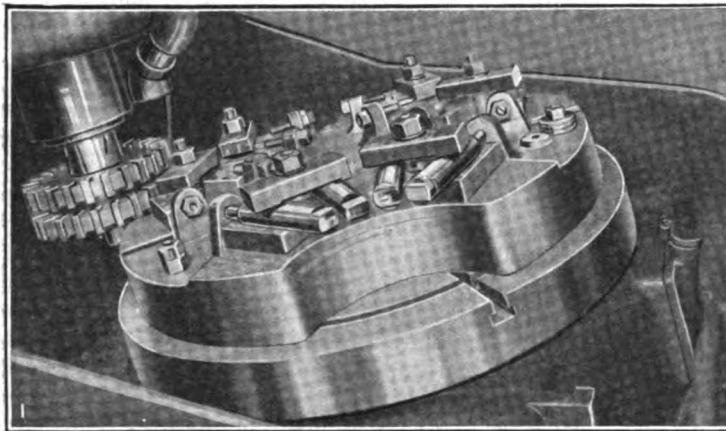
SPECIAL FIXTURE FOR MILLING STUDS. FIG. 2. GRINDING PISTON PINS
